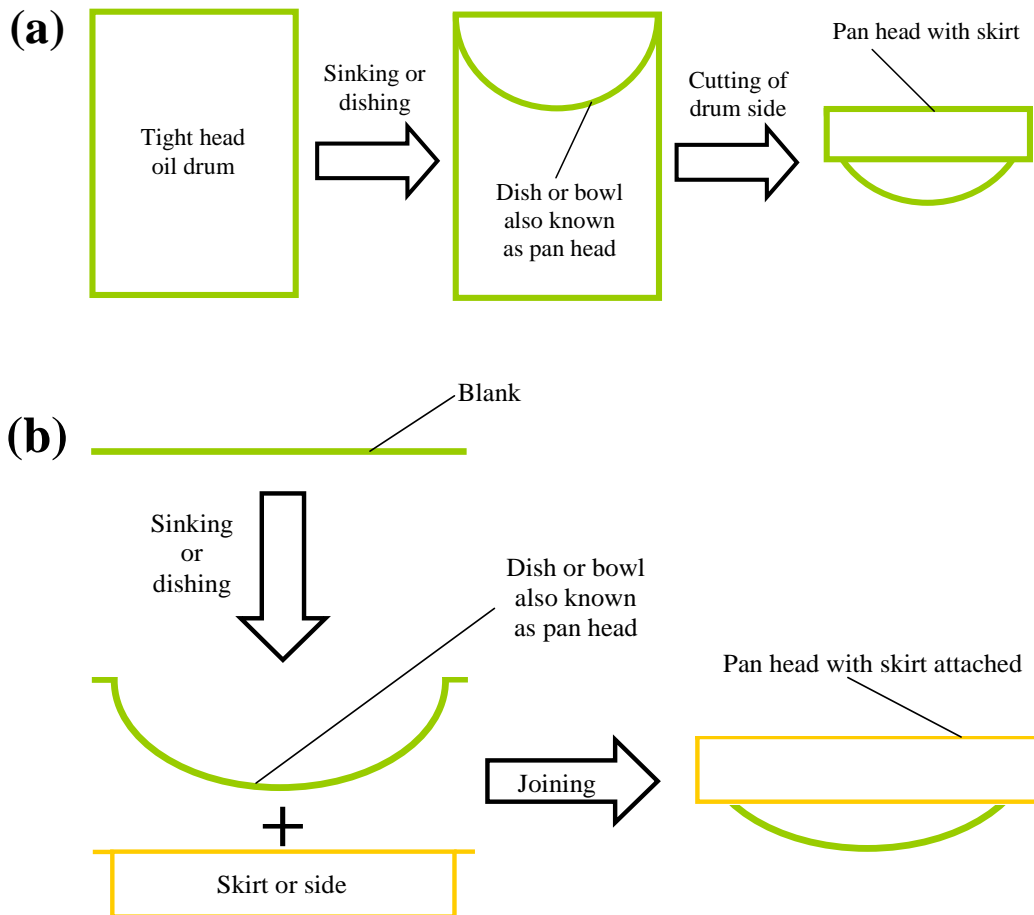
Pan dishing: (a) using tight-head oil drum and (b) using a sheet metal blank
